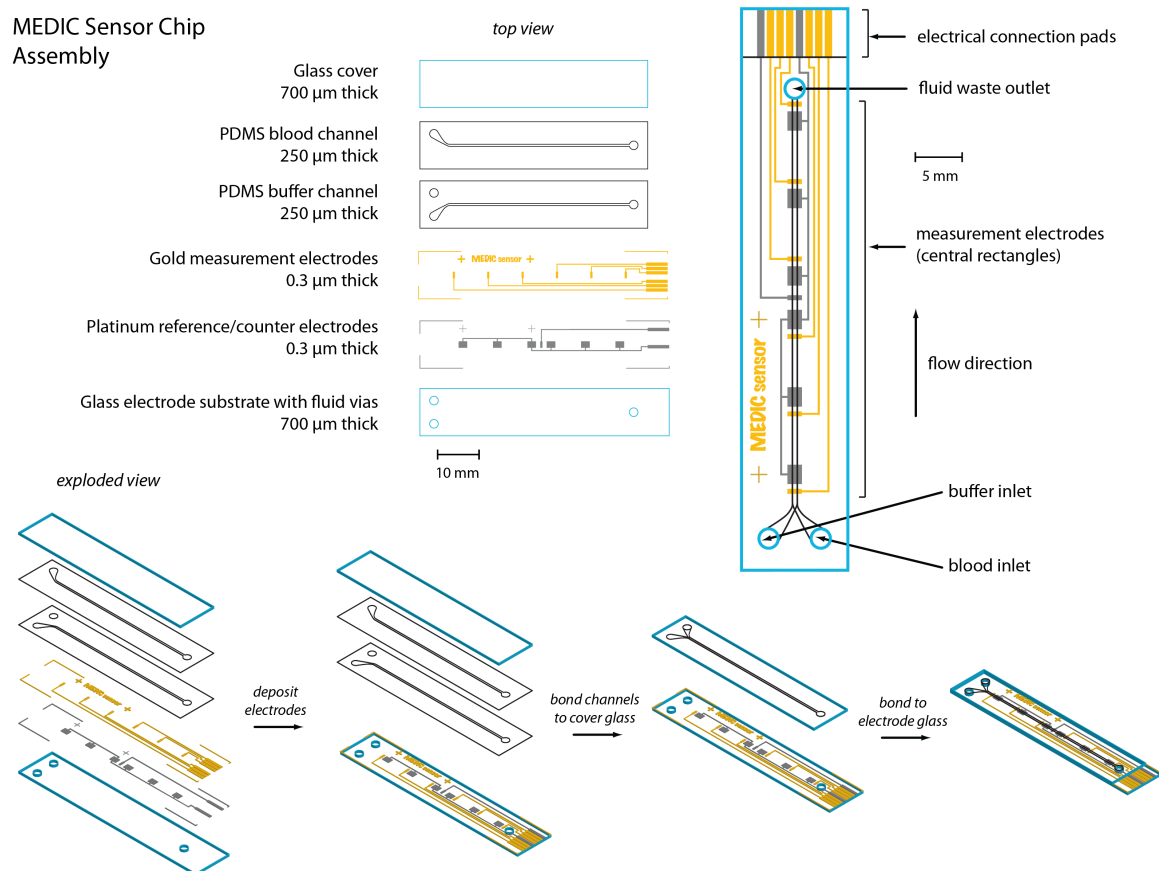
Exploded diagram of MEDIC chip components and assembly.
